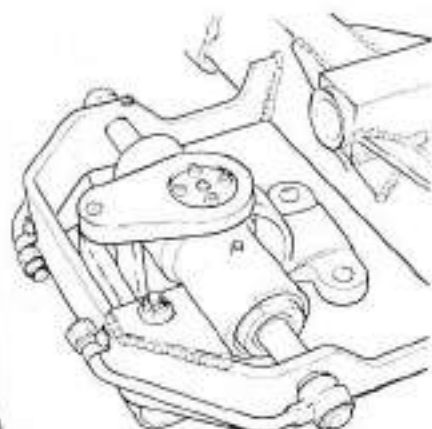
View showing installation of power steering cylinder on some 1210 and 1212 model tractors and all 1410 and 1412 model tractors.
